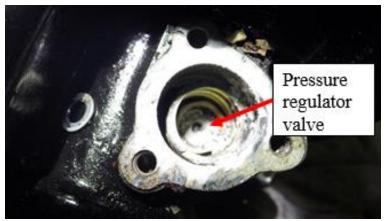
Fuel pressure regulator valve at the bottom of a fuel feeding chamber
